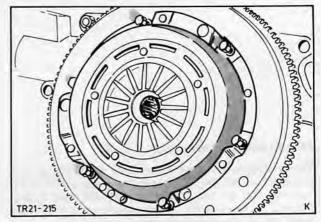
Remove clutch pressure plate with clutch disc from flywheel
